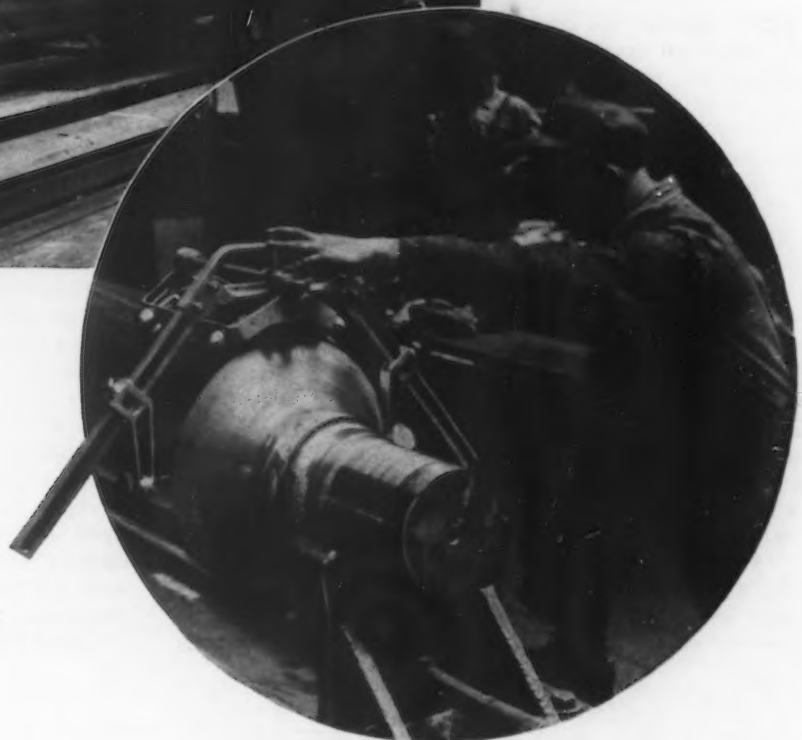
(Right) Caliper Used in Gaging a Roll. The arms are graduated and the reading is taken from the dial showing just over the journal. The wheeled carriage indicates how easily the gage is moved from one point to another along the length
